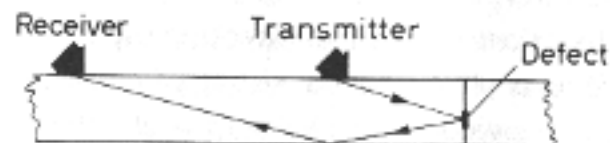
Use of shear wave probes to locate a defect in a butt weld
